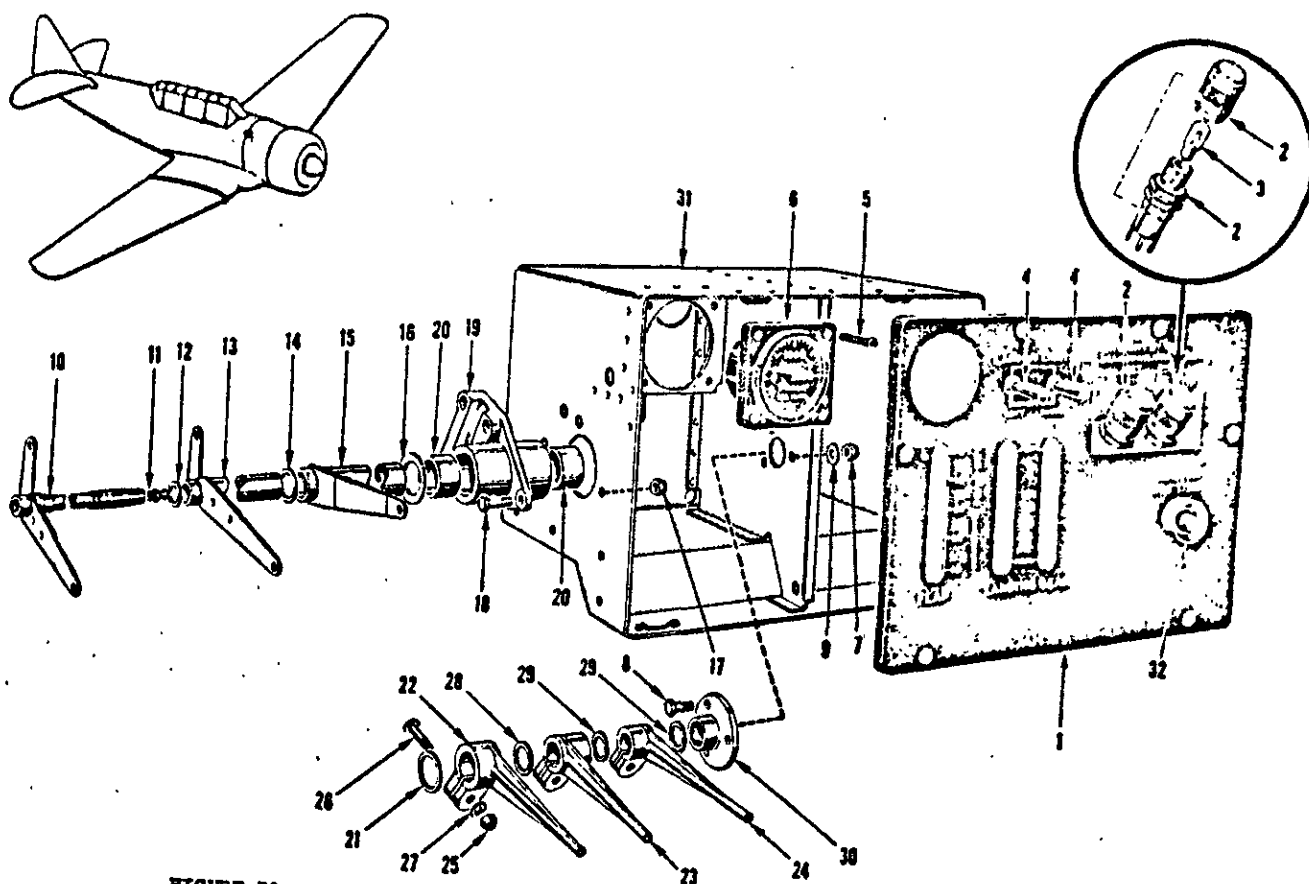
COMPLETE ALIGHTING GEAR POSITION INDICATOR BOX ASSEMBLY
